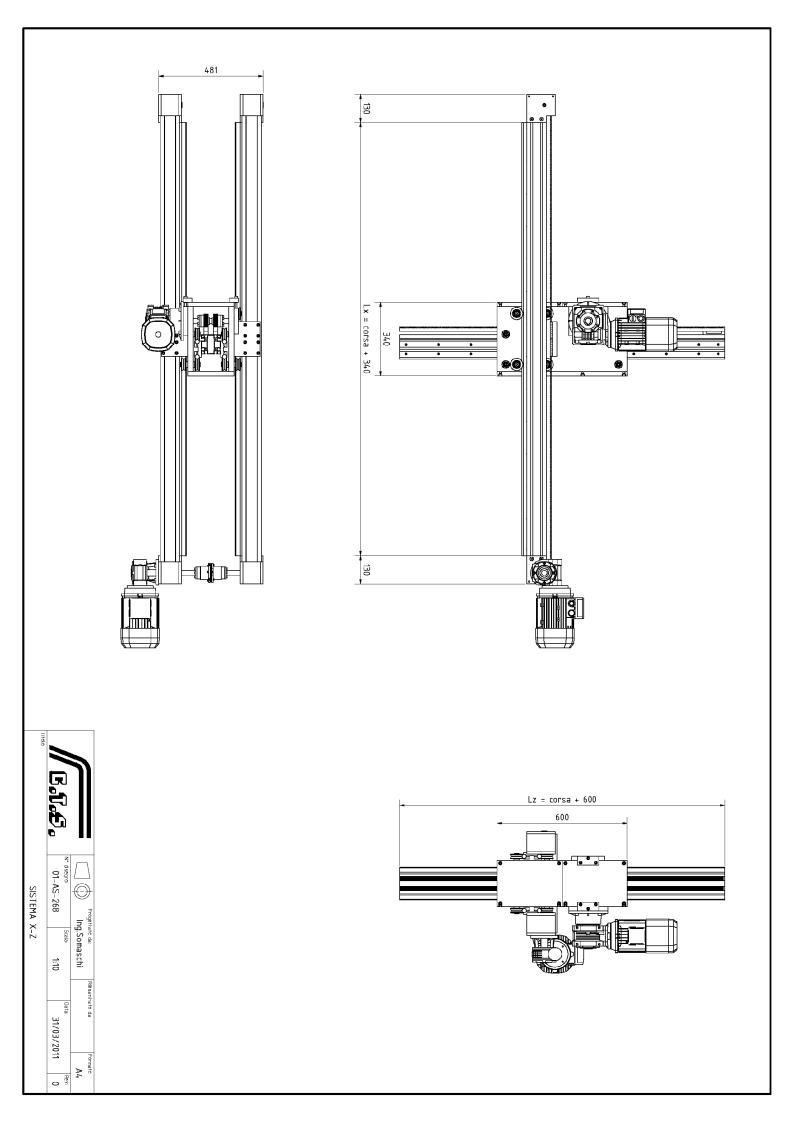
AS-268 HEAVY VERSION WITH AD416 GUIDES
